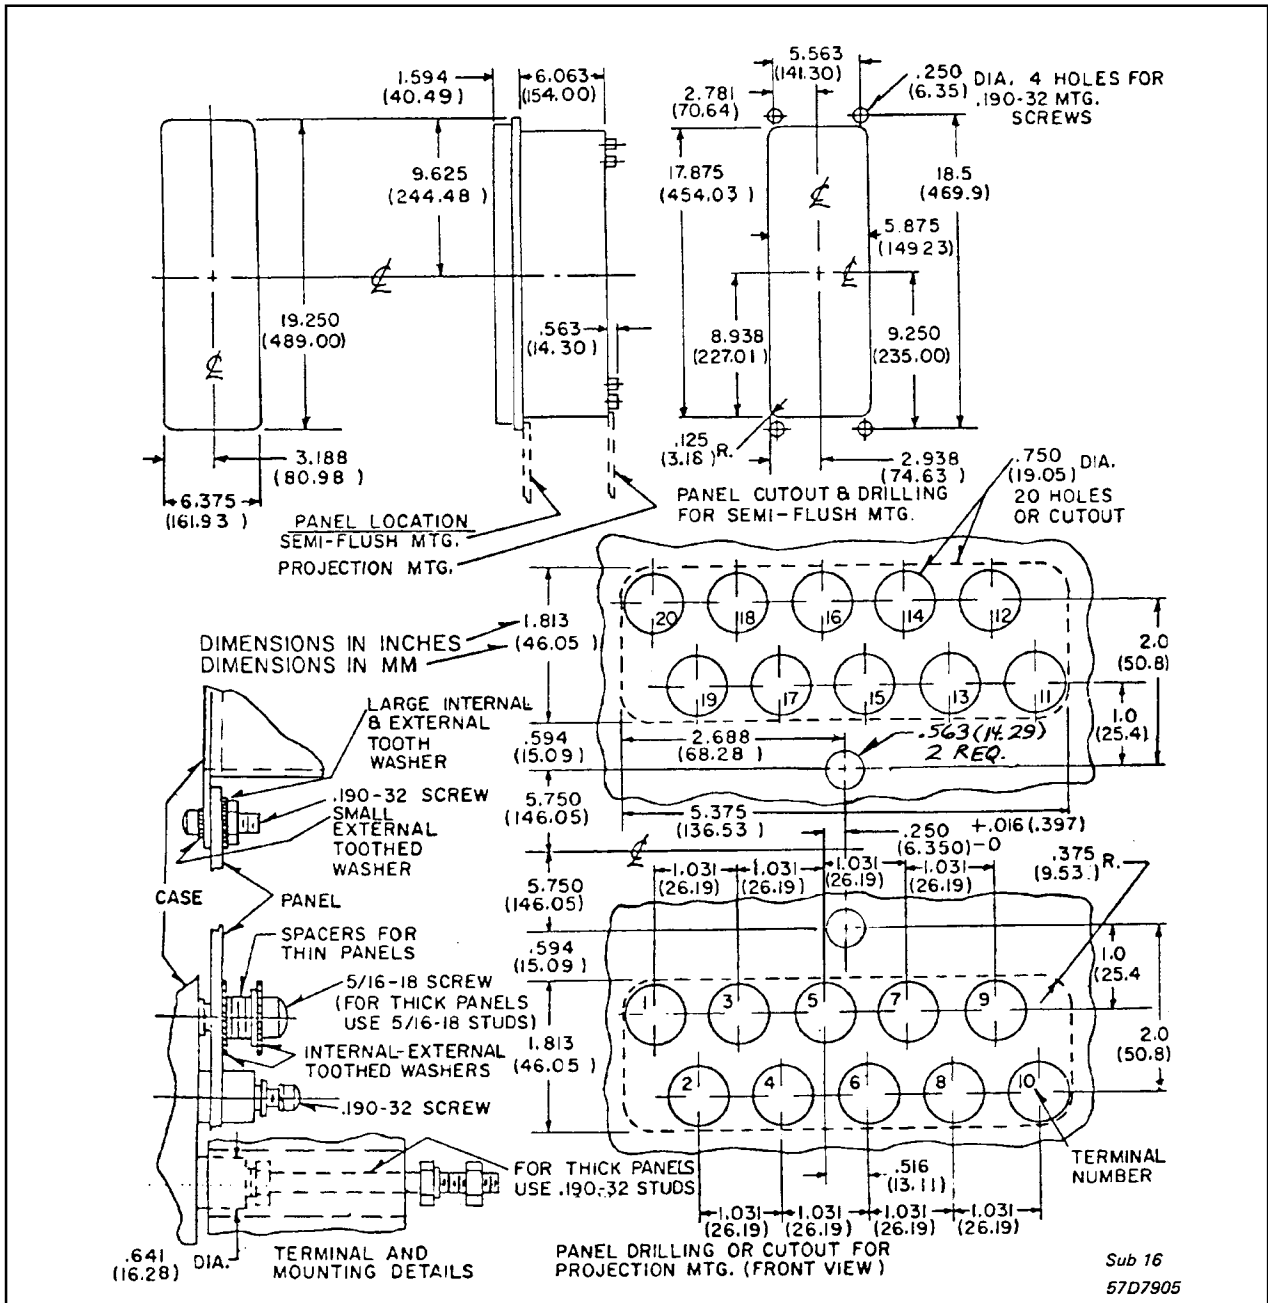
Outline and Drilling Plan of the Type W-2 Test Switch.
